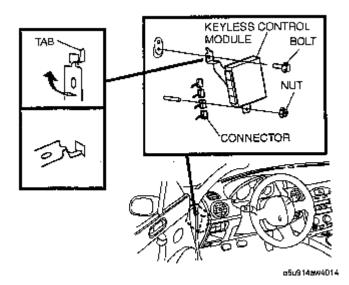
Disengaging Bracket Tab Courtesy of MAZDA MOTORS CORP.
